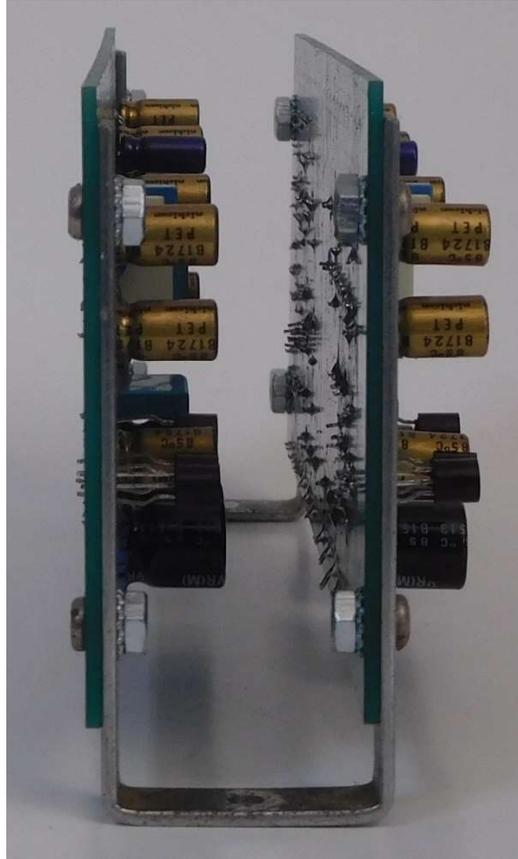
Both PCBs reassembled onto U brackets, ready for installation
